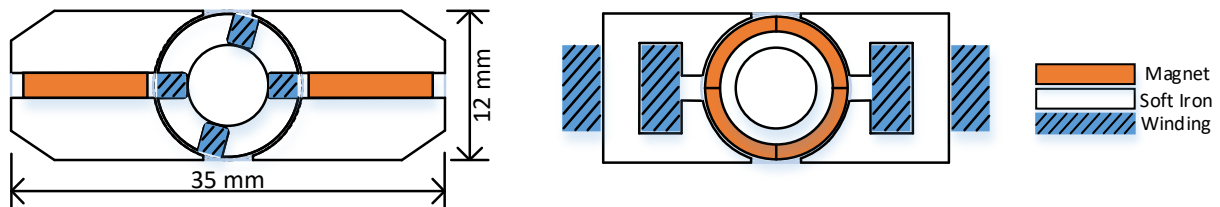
Proposed structures of the embedded limited-angle torque motors (LATM), left: torque motor TM1 with magnets in the outer part, right: torque motor TM2 with magnets in the inner part
